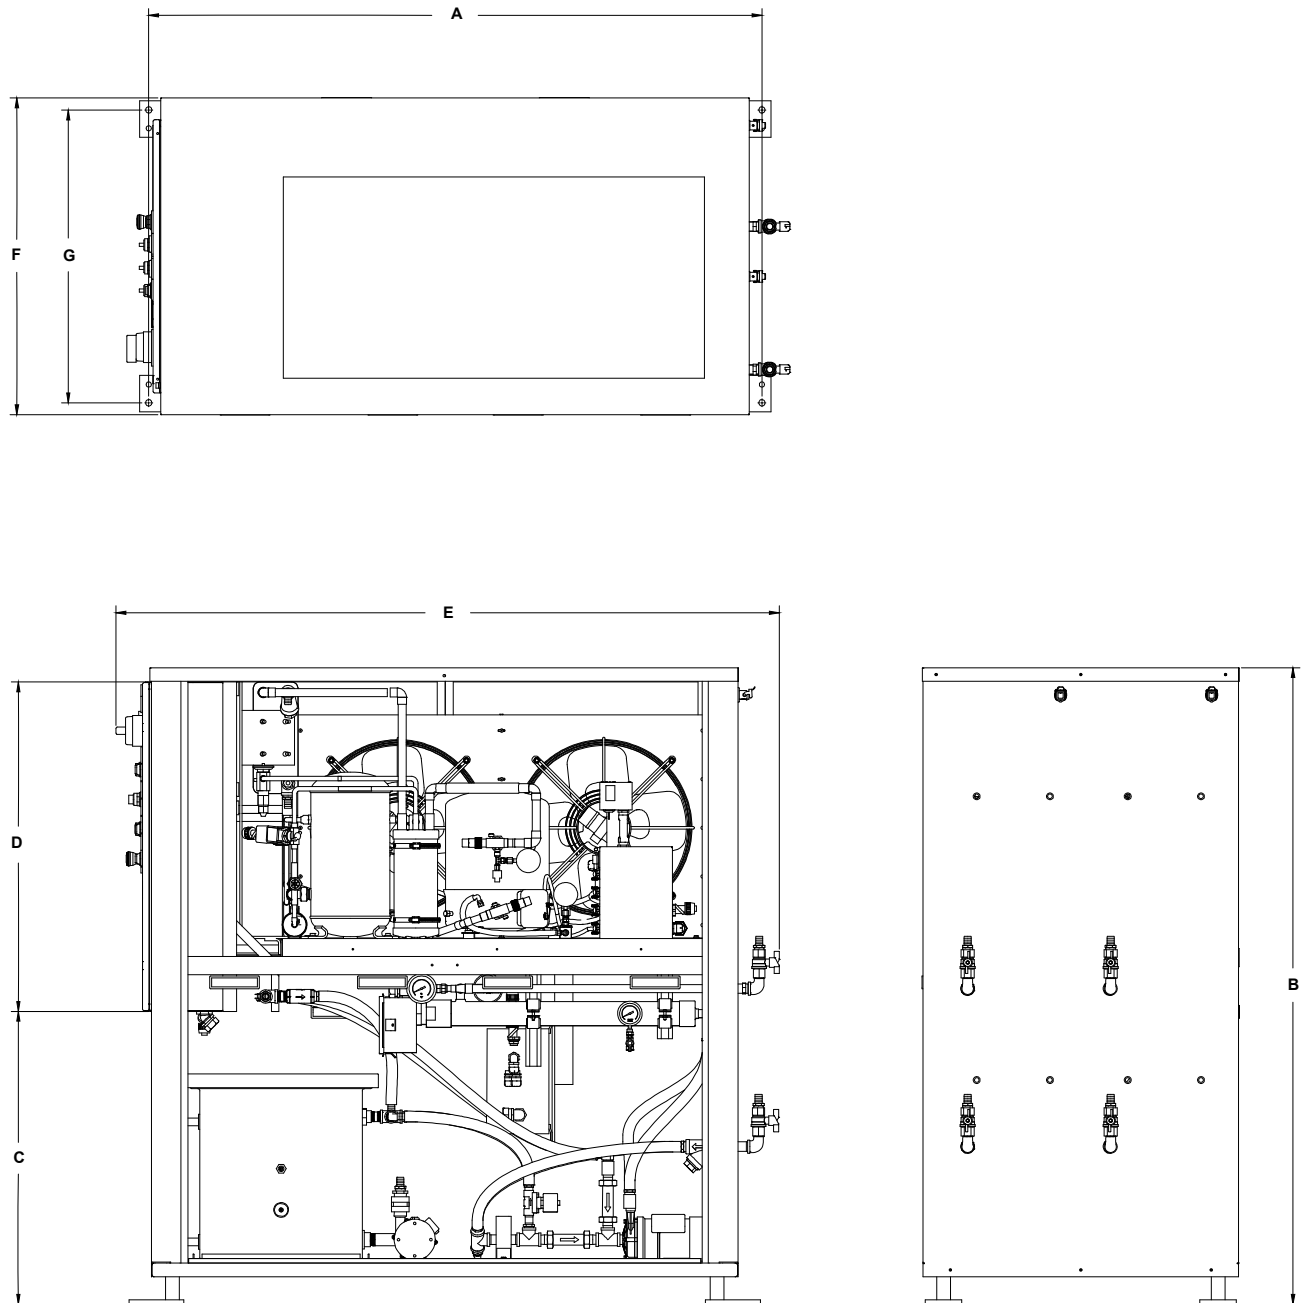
Dual-Air Cooled System Without Heat Exchanger Dimensions
